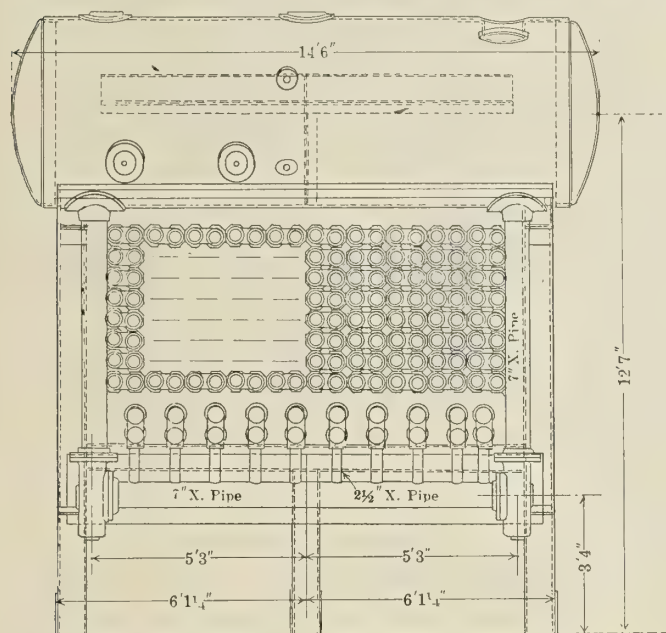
Craig Boiler. 2,000 Square Feet Heating Surface
